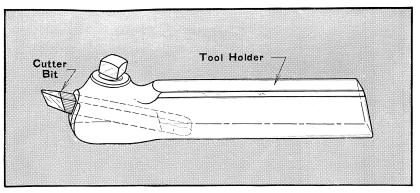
Lathe tool holder with high speed steel inserted cutter bit.
